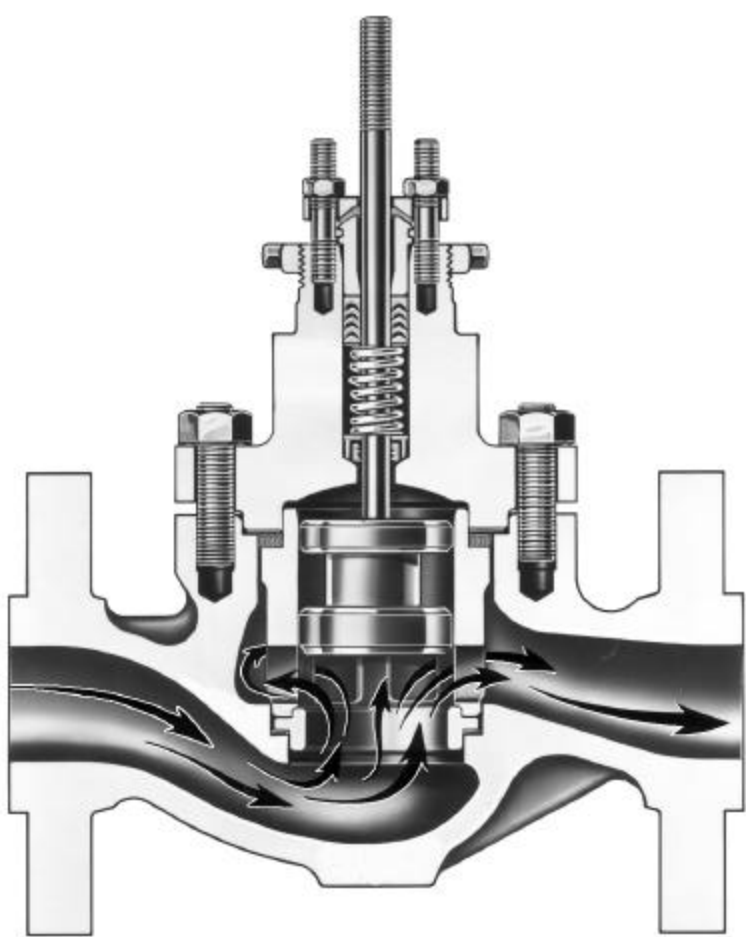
Cross-section of a globe valve body assembly with an unbalanced plug. Courtesy of Fisher-Rosemont.
